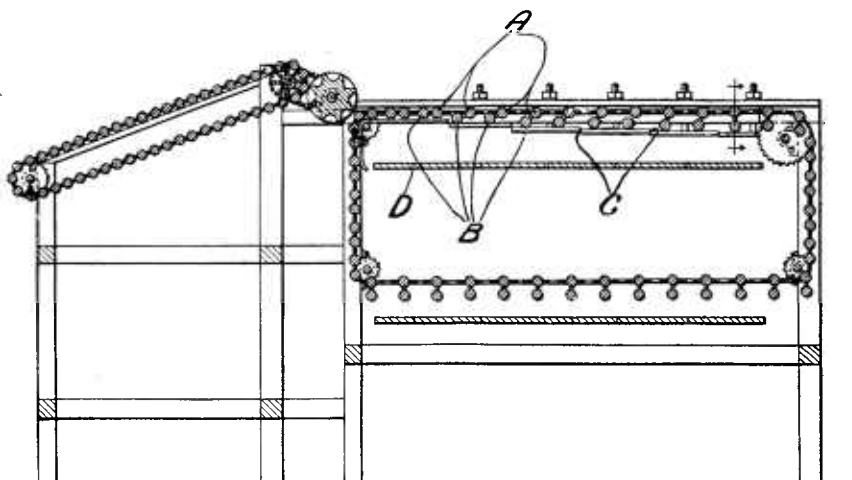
Longitudinal section of the grading and sizing units: A and B, sizing rollers; C, steps to permit enlarging of opening; D, distributing belt.
